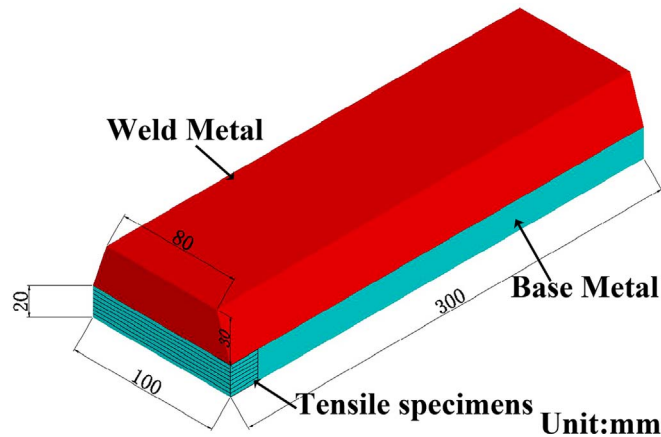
Weldment schematic and locations of tensile specimens in parent alloy.
